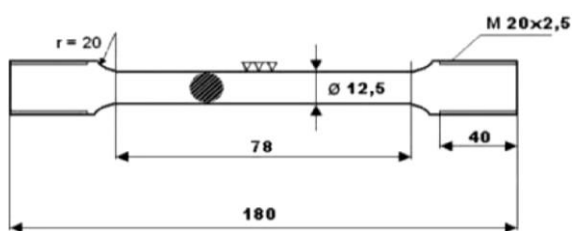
The geometry and dimensions of standard tensile test specimens used in the tensile tests.
